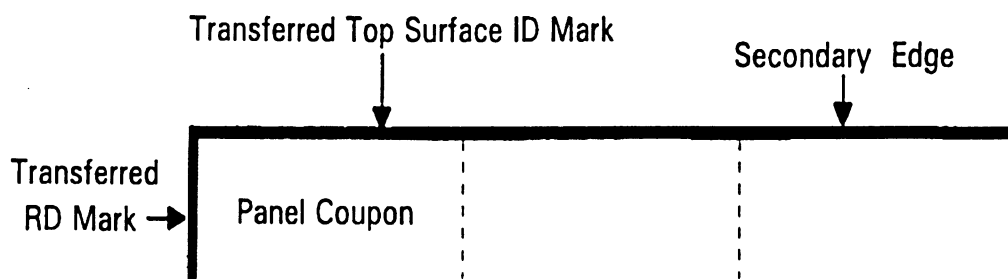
Panel coupons sheared from the test coupon strip¹⁸
